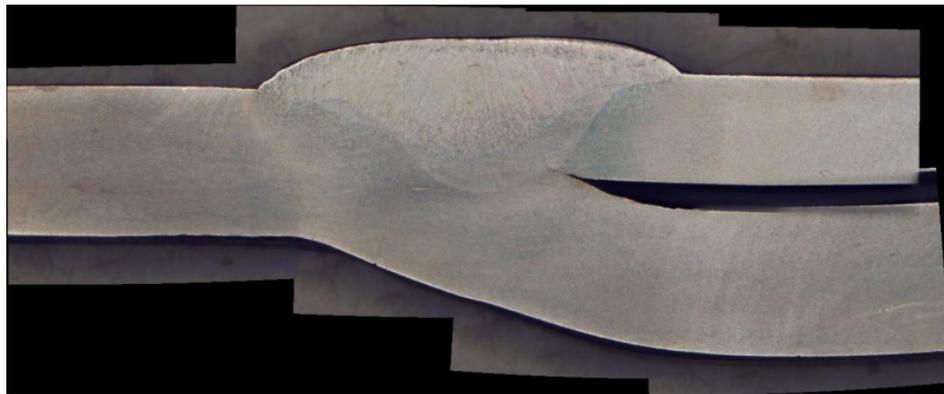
Photograph. A cross-section of a lap/joggle joint showing full penetration of the weld bead. This section of weld did not have indications “in the weld.”
